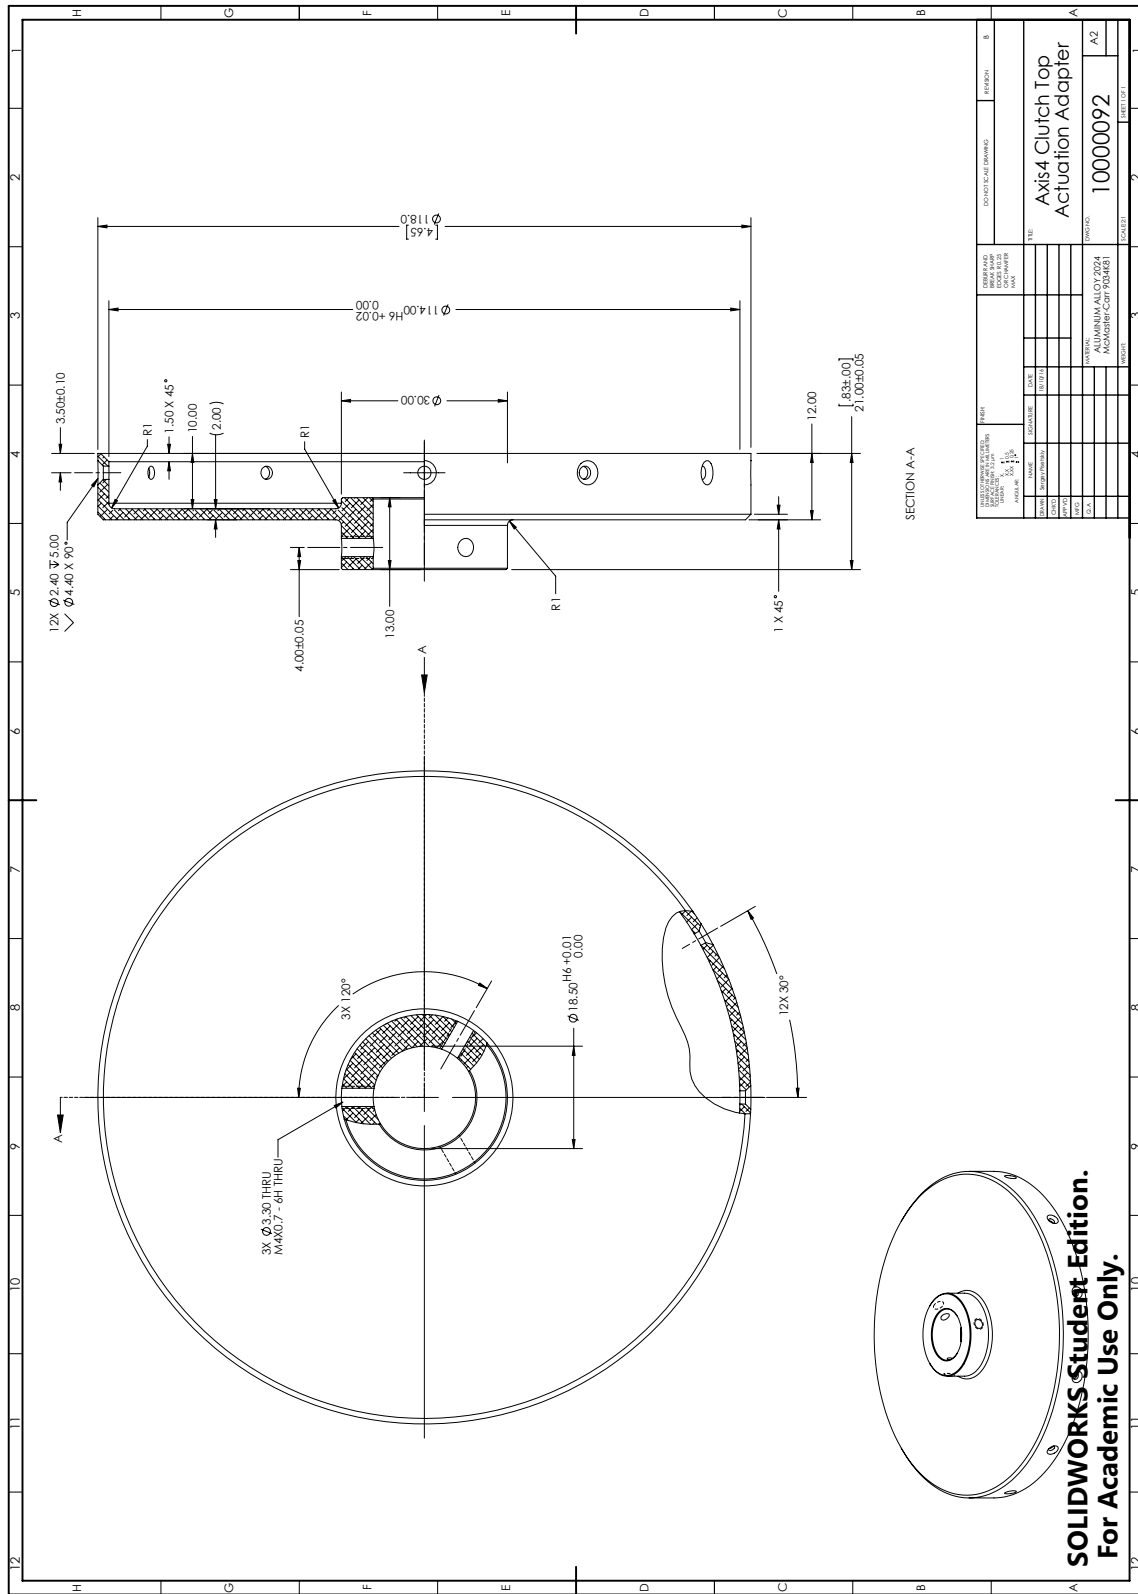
Drawing: Join 4 clutch pair top actuation adapter.
